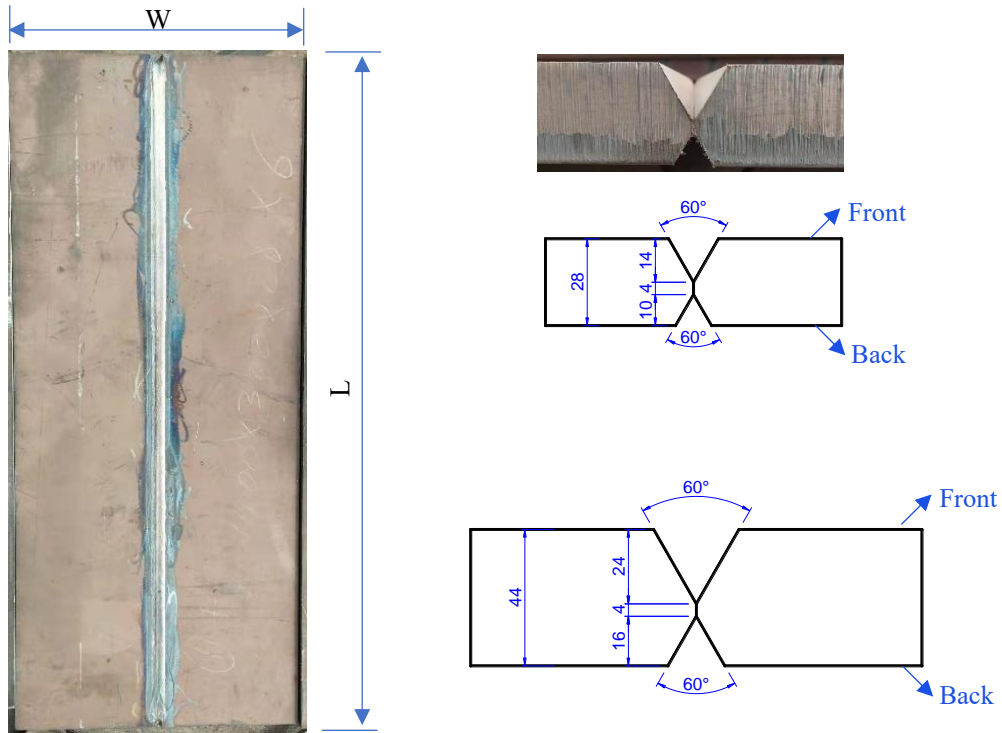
Butt-welded sections of Q620 TM steel with an X-shaped groove
